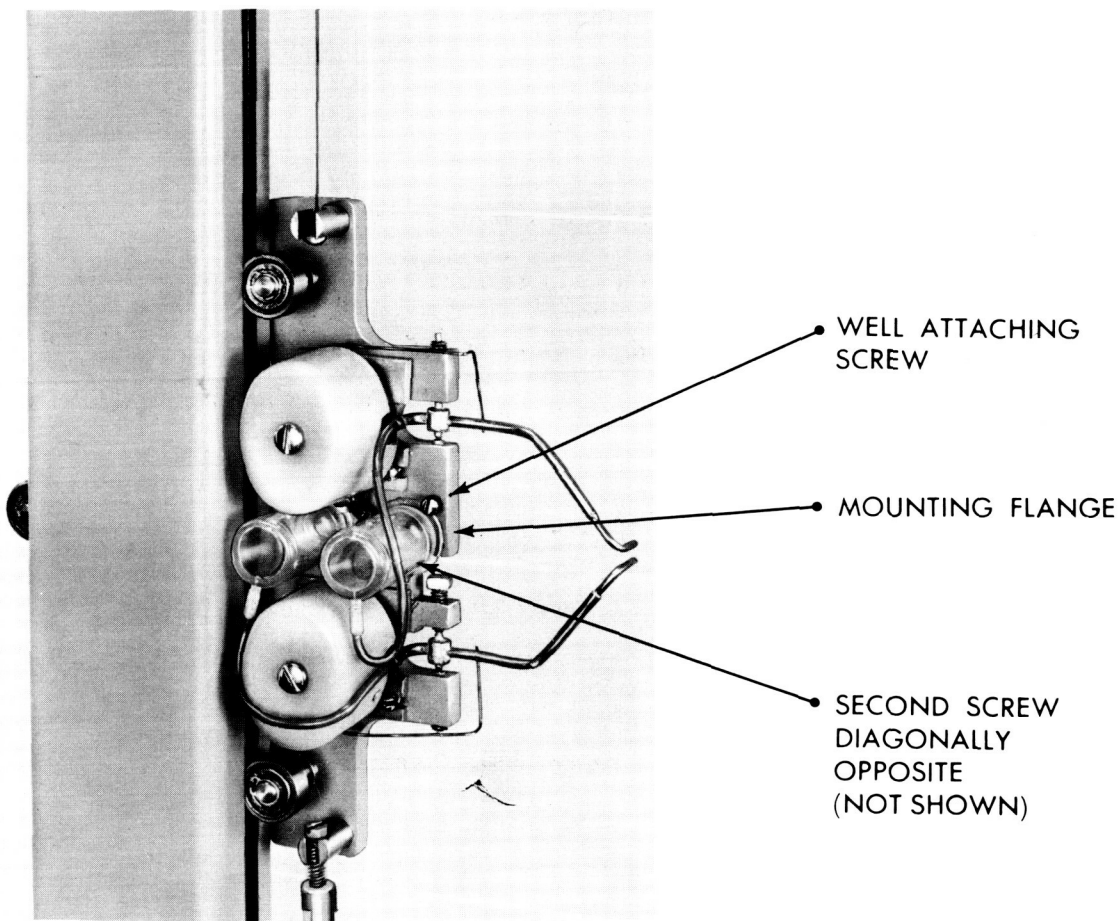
Ink Well, Hose, and Pen Assembly Removal.
